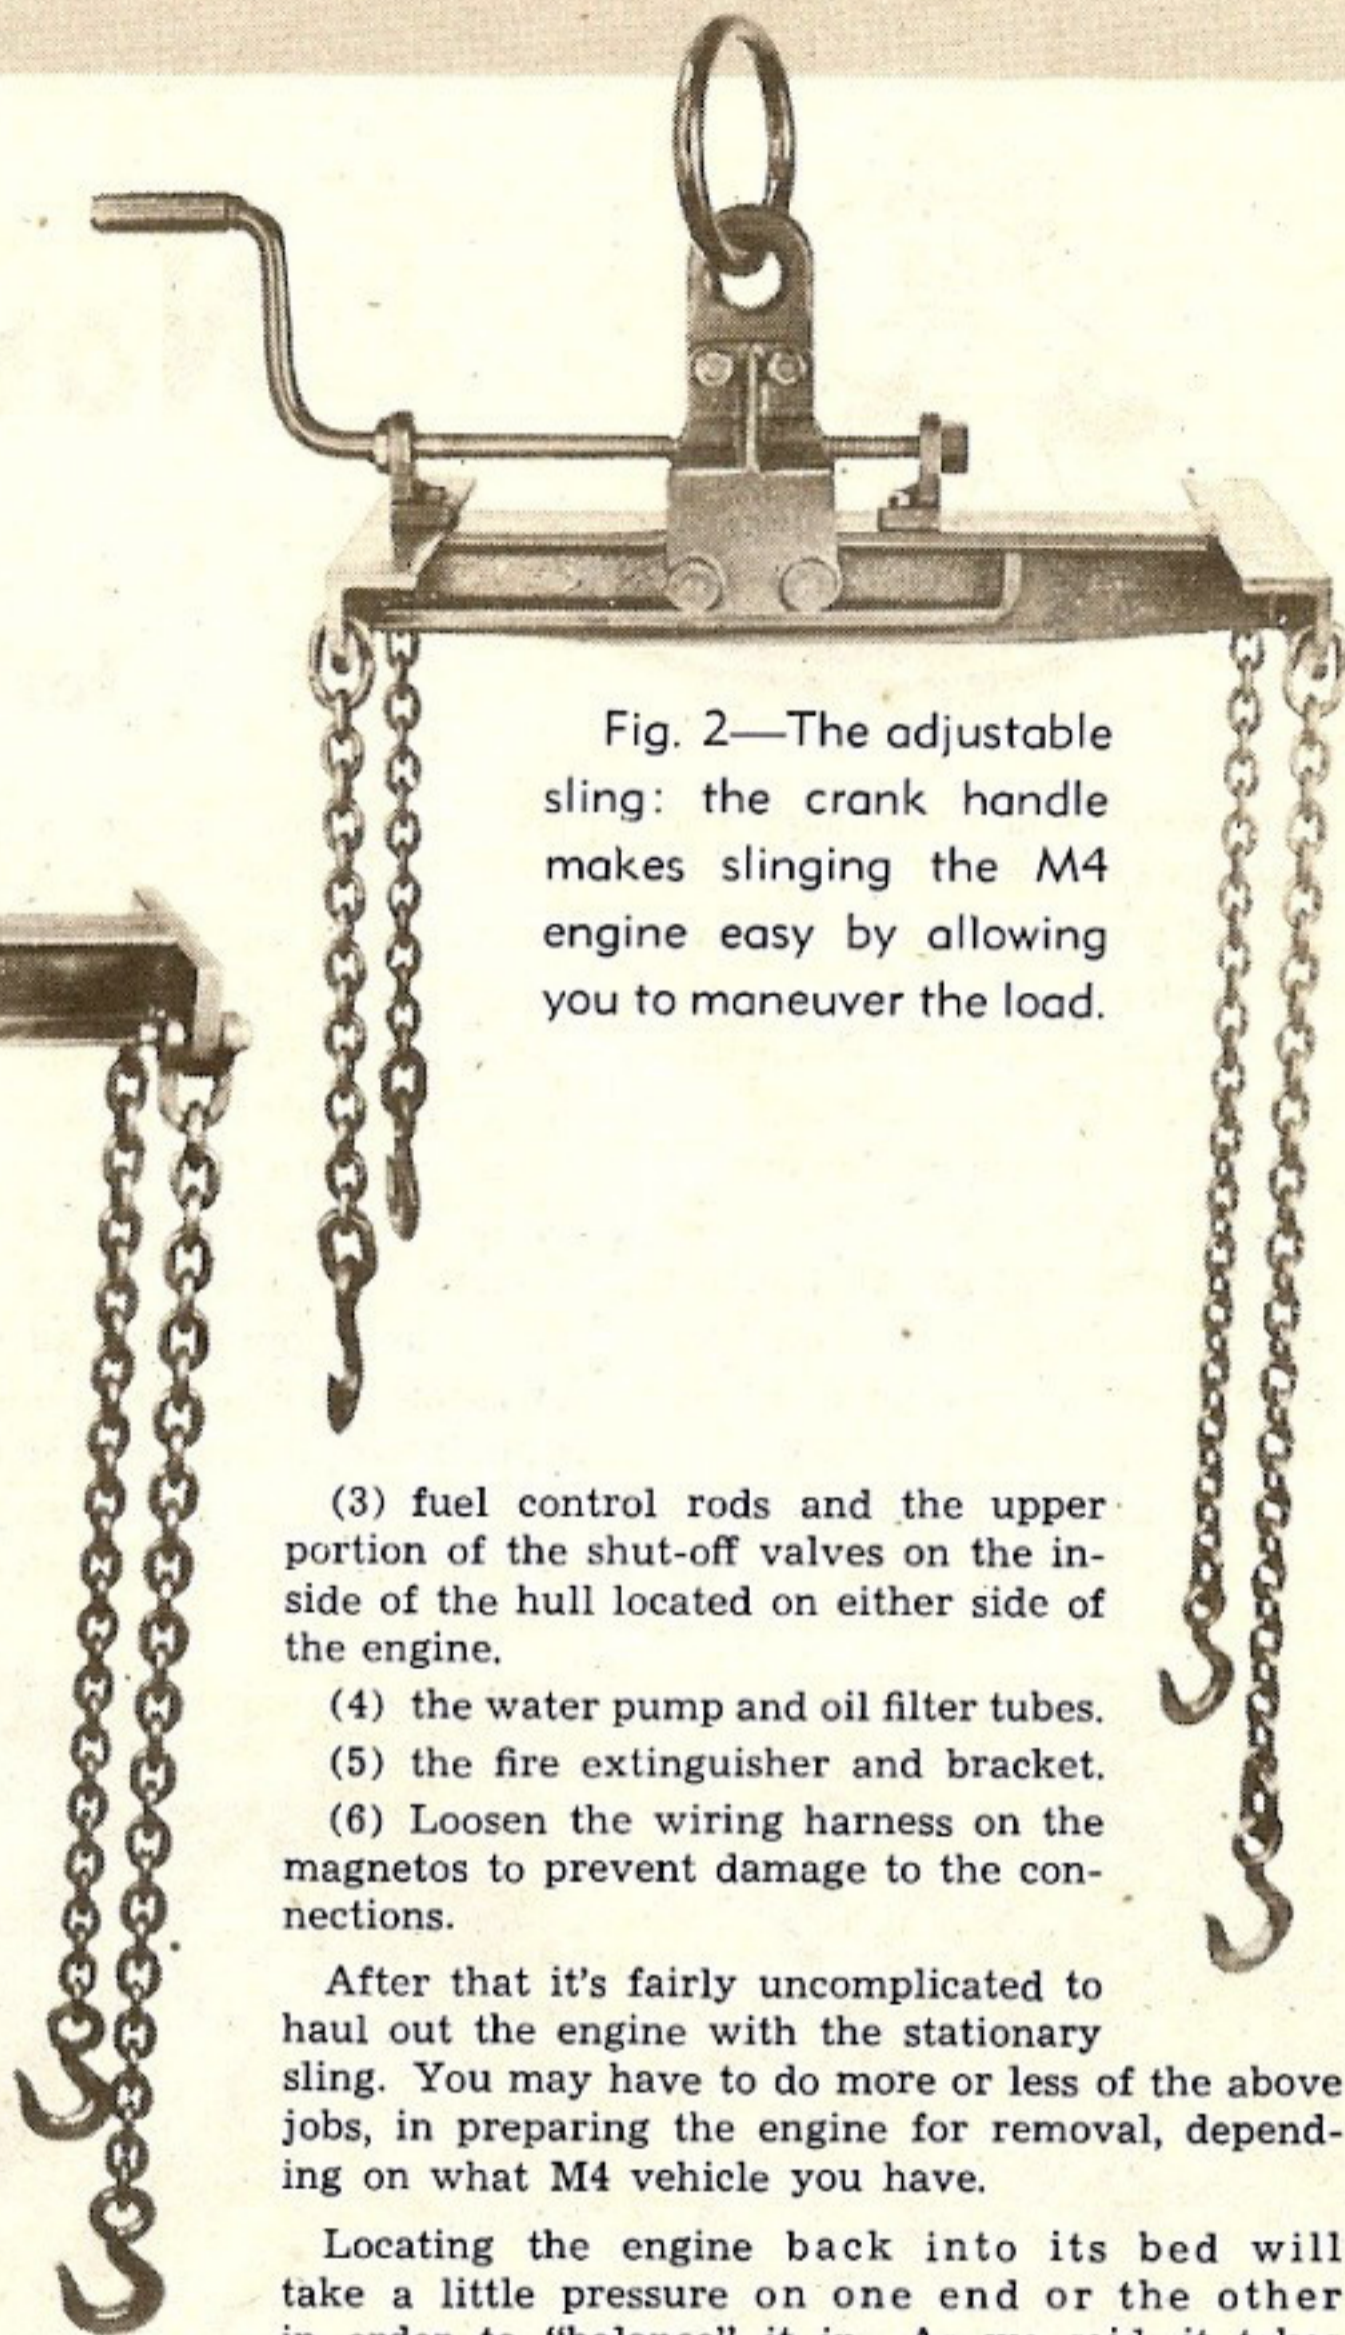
The adjustable sling: the crank handle makes slinging the M4 engine easy by allowing you to maneuver the load.
